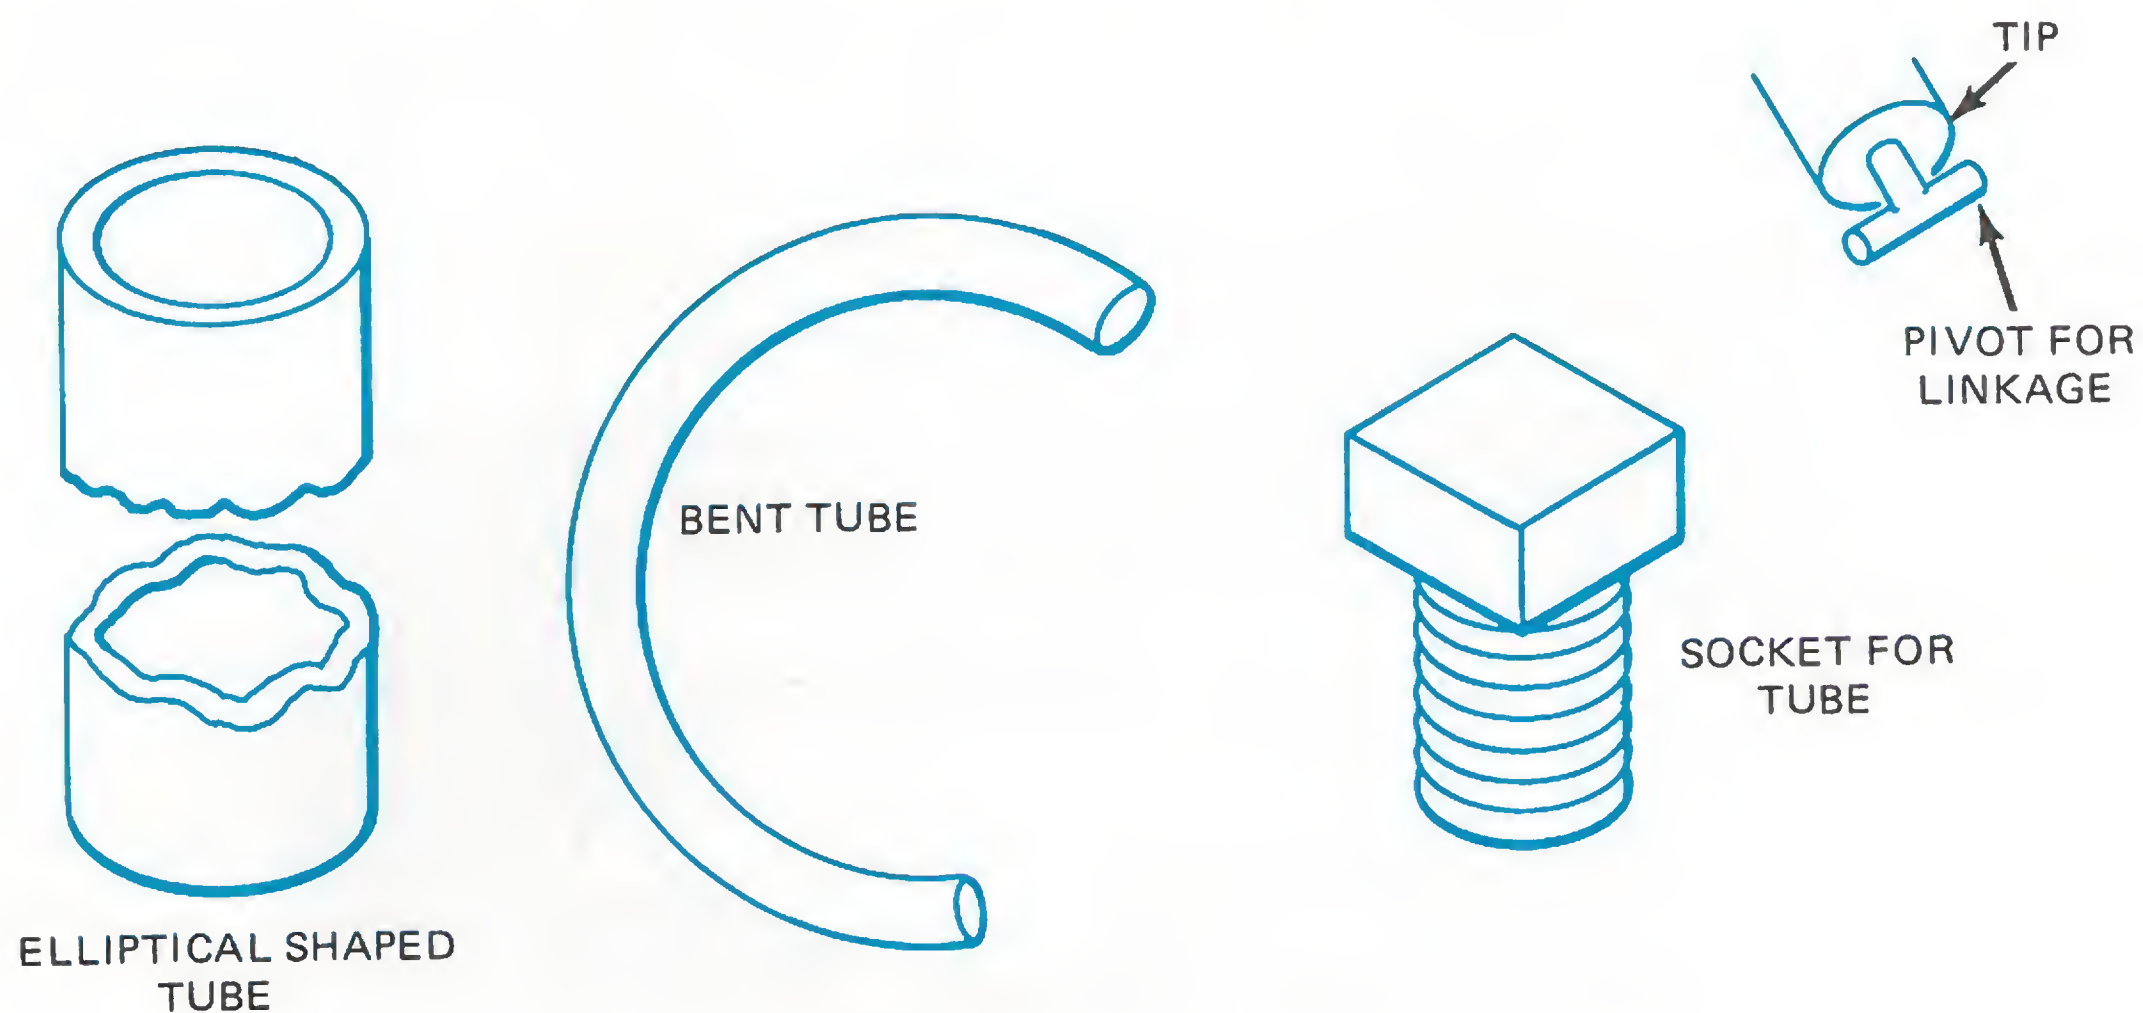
Component Parts of a Bourdon Tube Gage
